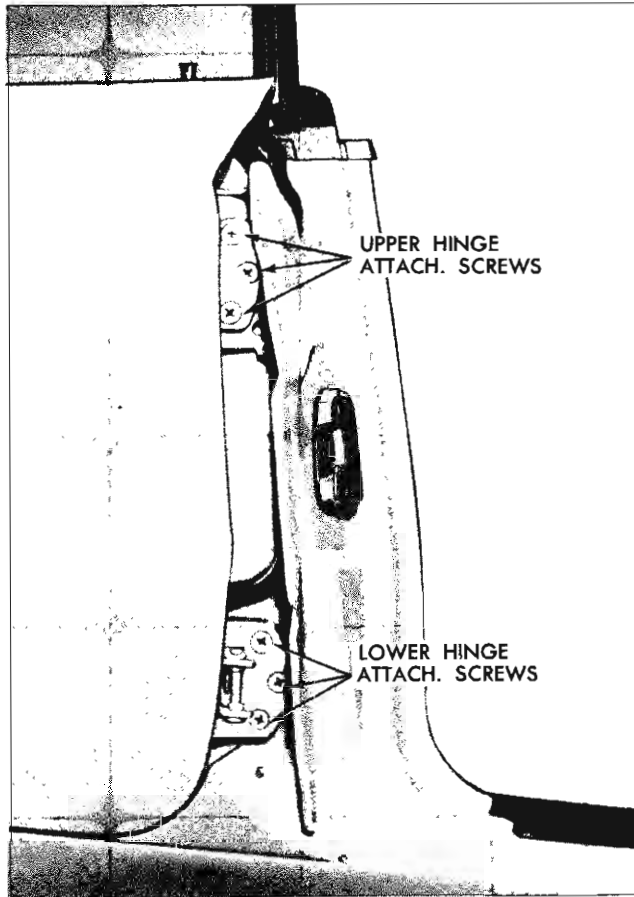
Door Hinge Attachment - At Body Pillar
